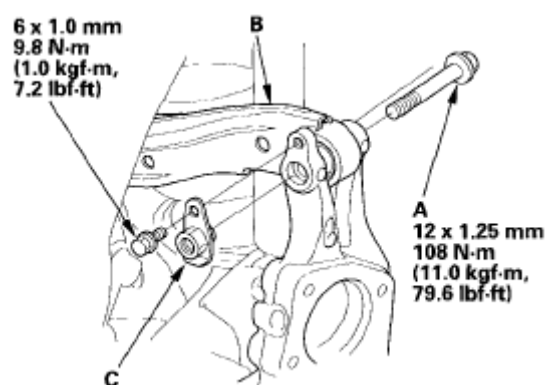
Identifying Upper Arm Mounting Bolt (With Torque Specifications)
